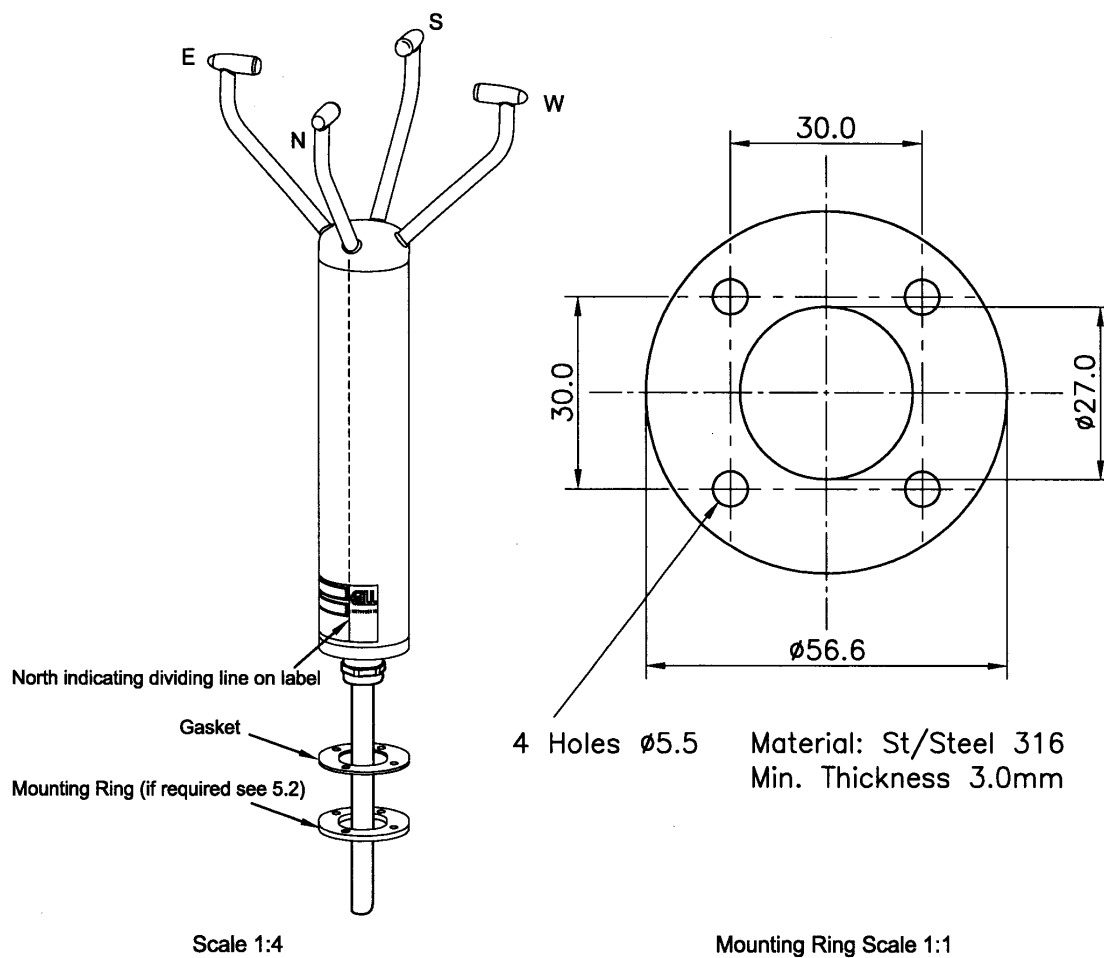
Suggested mounting bracket and Earthing (grounding) arrangements
